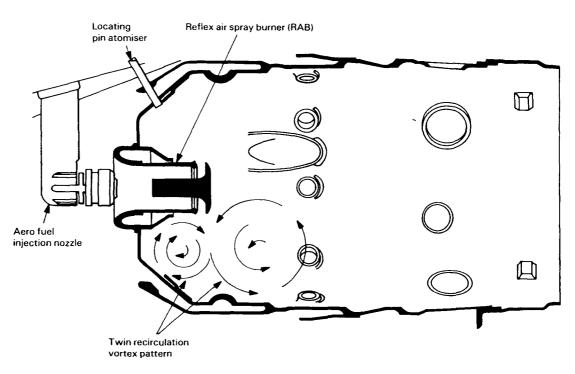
REFLEX AIR BURNER (RAB) COMBUSTOR
